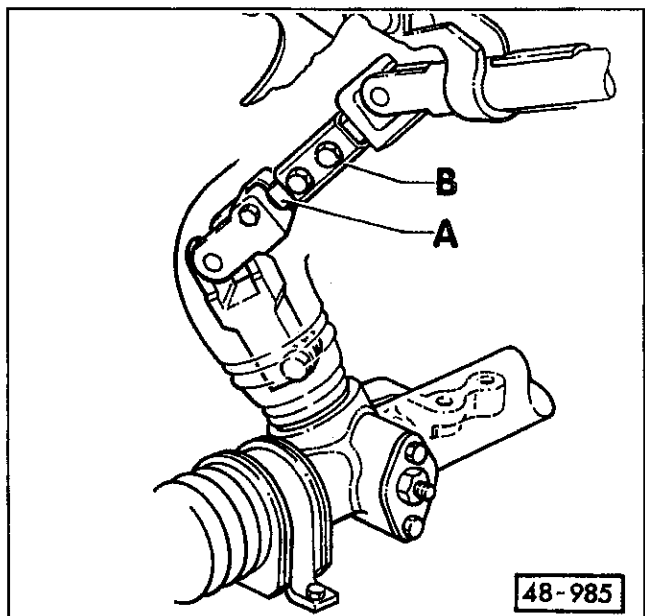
When lifting engine/transmission assembly, lower half of joint shaft (A) must be guided into upper half of joint shaft (B).
